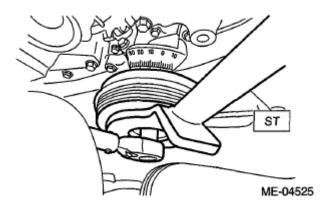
Tightening Crank Pulley Bolt Courtesy of SUBARU OF AMERICA, INC.
